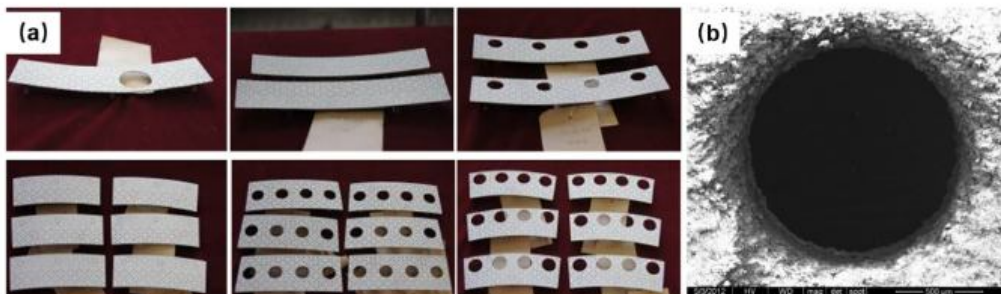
(a) TBCs coated on the combustor tile and (b) the edge morphology of the cooling hole with TBCs.
